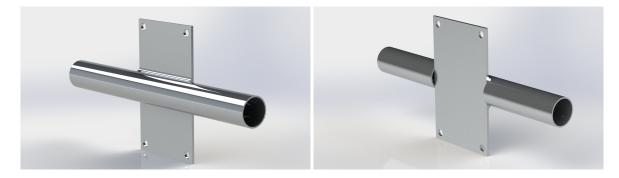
SolidWorks Custom Motor Mount Renders (Front and Back)
